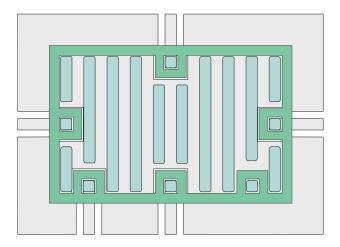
Solder Stencil and Solder Mask Overlaid on Land Print.
